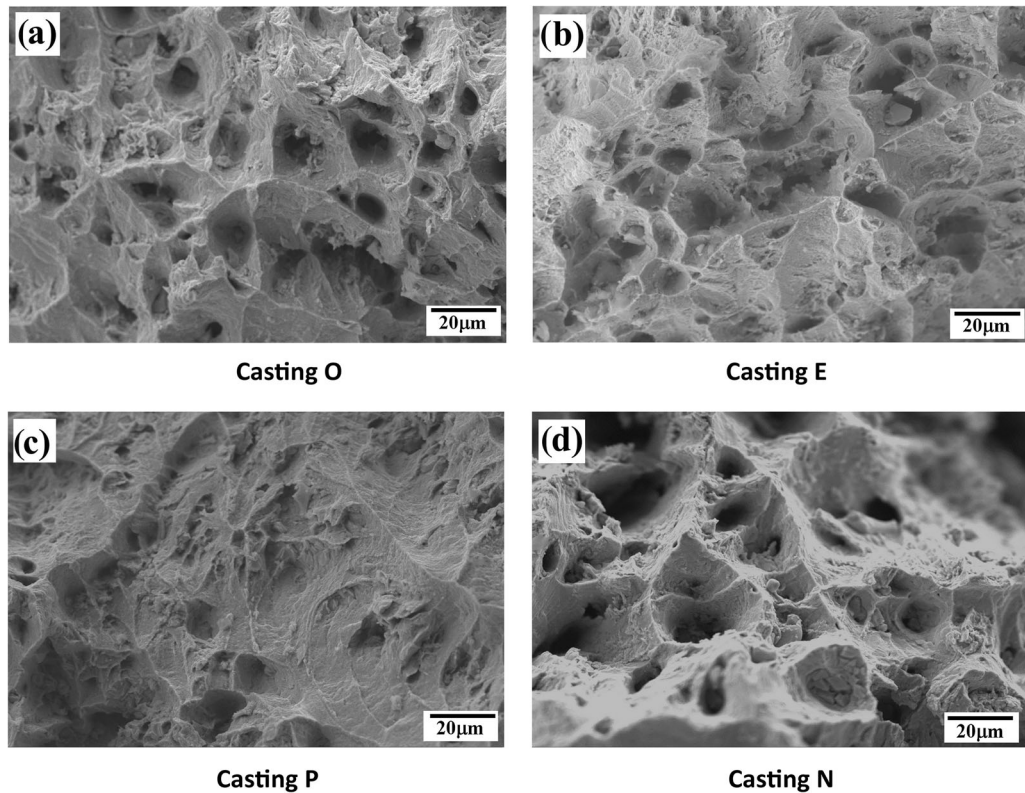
Fracture surfaces of on-heating samples pulled at 1000 °C: (a) casting O, (b) casting E, (c) casting P, and (d) casting N.
